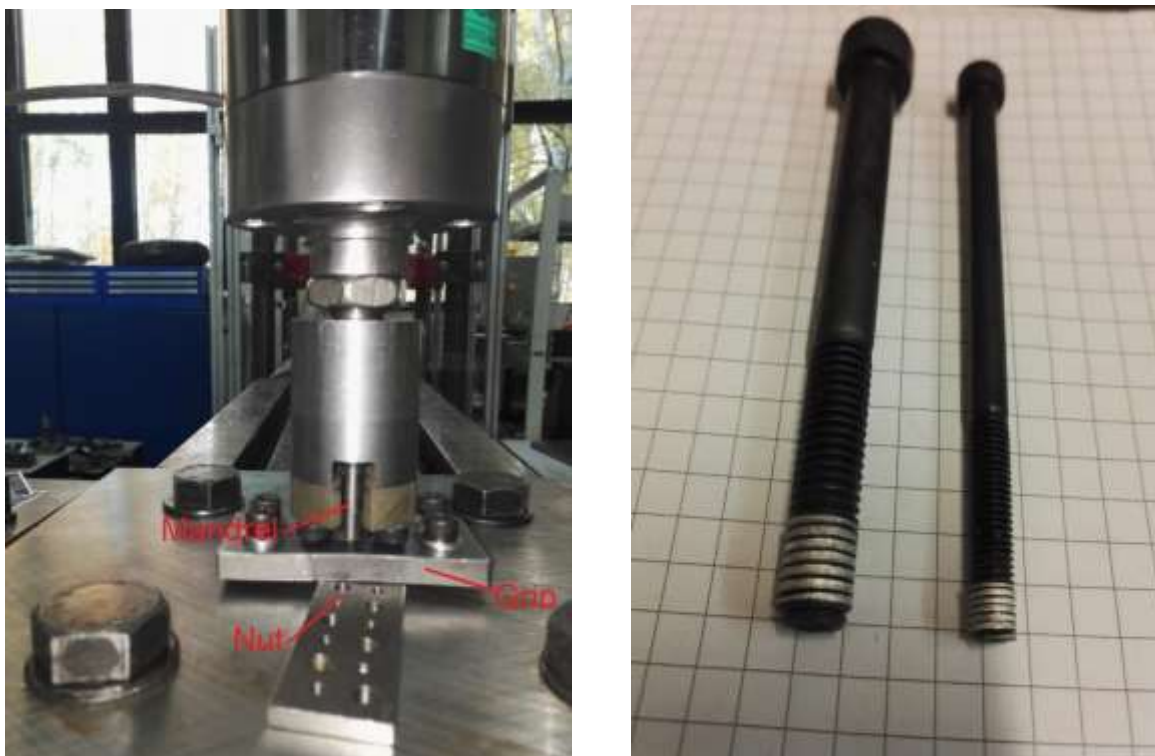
Axial tensile test setup for thread stripping and stripped threads on bolt
